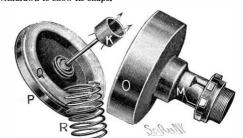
DETAILS OF THE AUXILIARY AIR VALVE AND ITS DIAPHRAGM.
